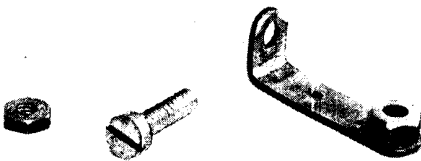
Supporting bracket, with screw and lock nut, which is an end-bearing of the drum
